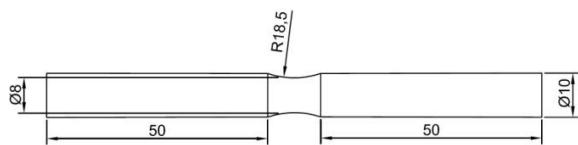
Dimensions of 6061 alloy BM rotary fatigue specimens (mm).
